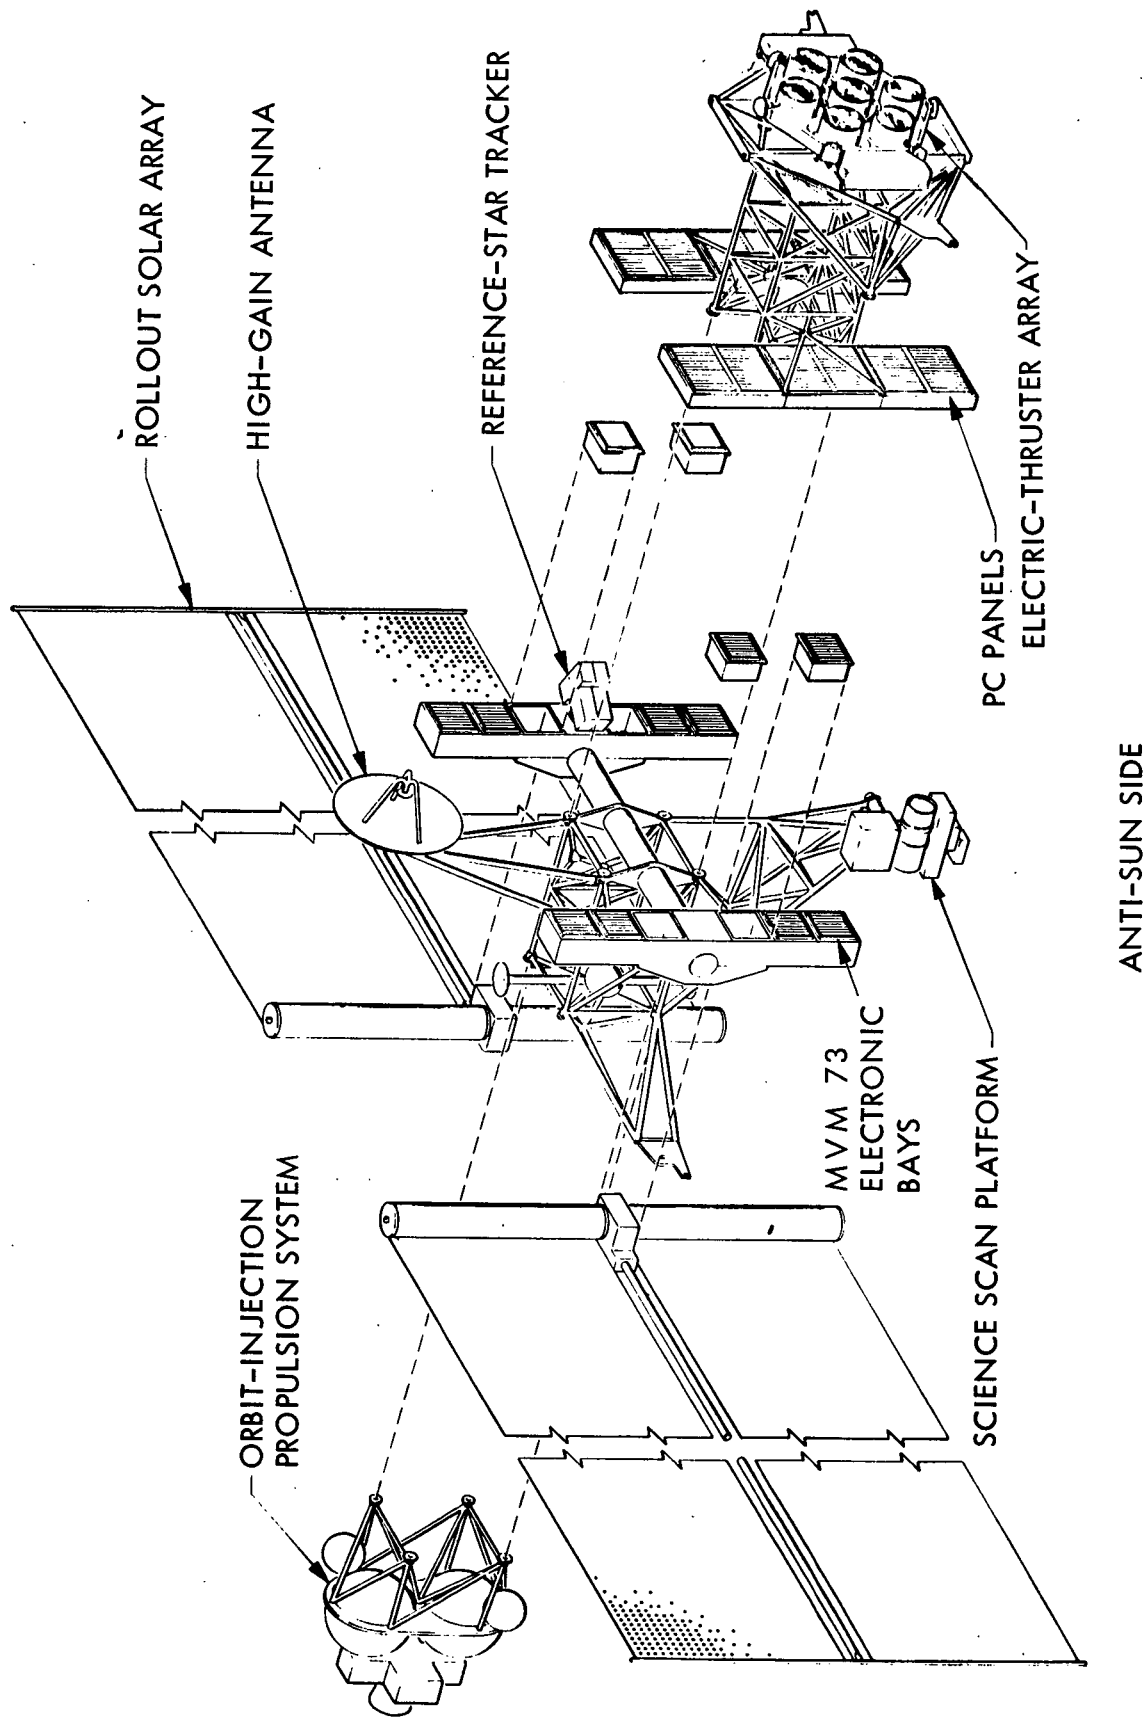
Option 2 Space-vehicle Configuration, Exploded View
